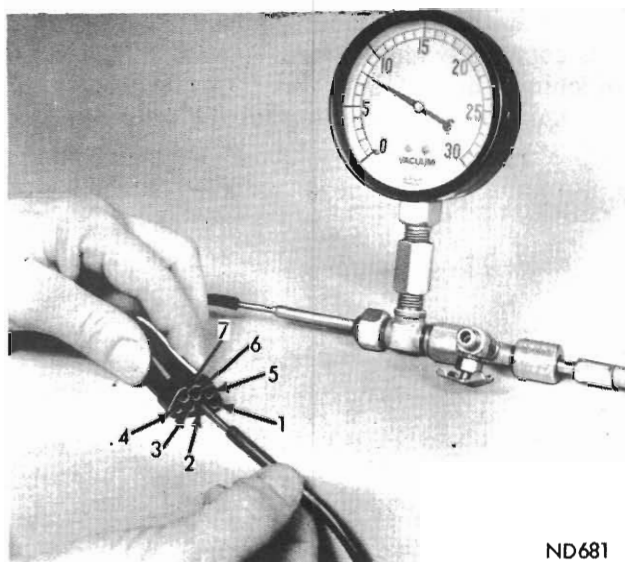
Push button vacuum test - connector plug installed (typical view)
